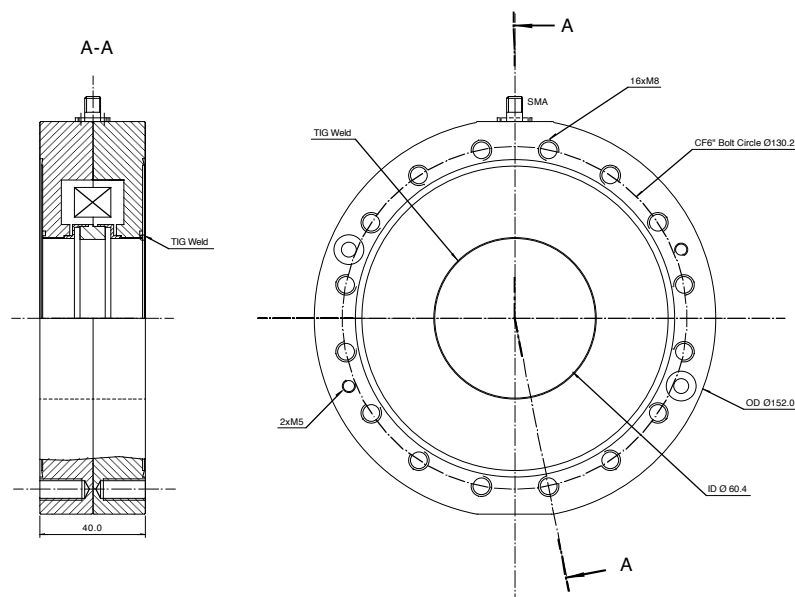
Mechanical drawing of an In-flange.FCT-UHV
